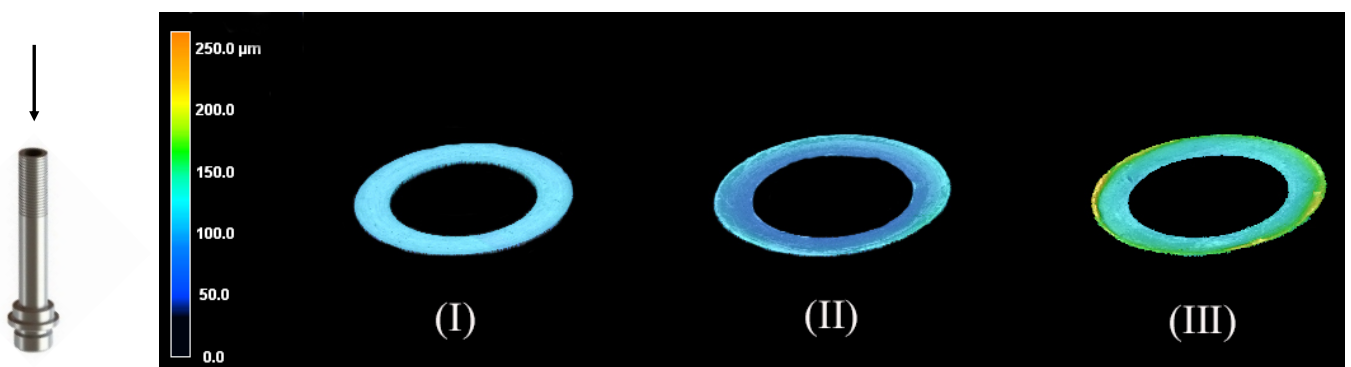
Topography maps of the tip surface of the adjustable shoulder showing evolving plastic deformation where: (I) 0 welds performed, (II) 15 welds performed, (III) 200 welds performed.
